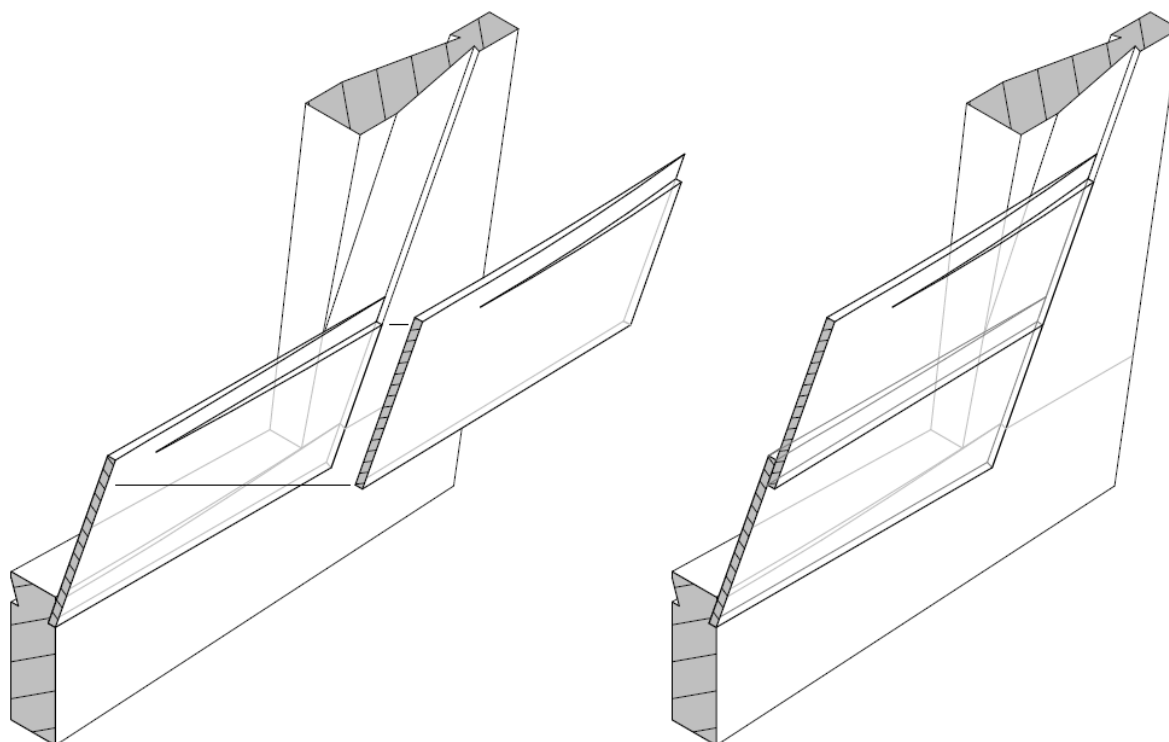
Gerald rabbet diagram of planks at sternpost from the port side. Cross section showing overlap of planks. Rabbet is cut at land for overlapping plank above to terminate at end flush with lower plank. (Source: Benjamin Wharton 2021).
